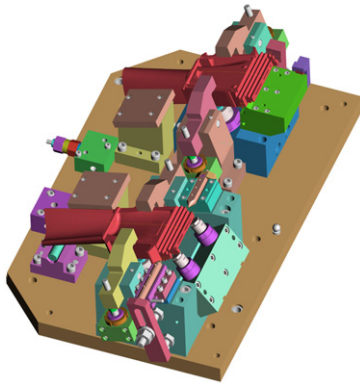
Grind fixture for turbine blades (aerocad design, inc.) [20].
